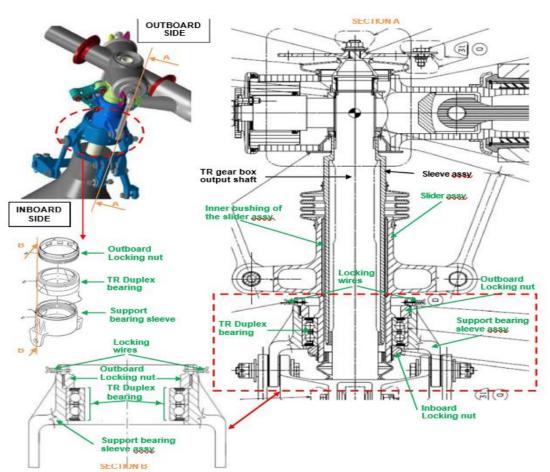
Drawings of the assembled tail rotor rotating parts, and the assembled support bearing sleeve assembly, duplex bearing and outboard locking nut.
